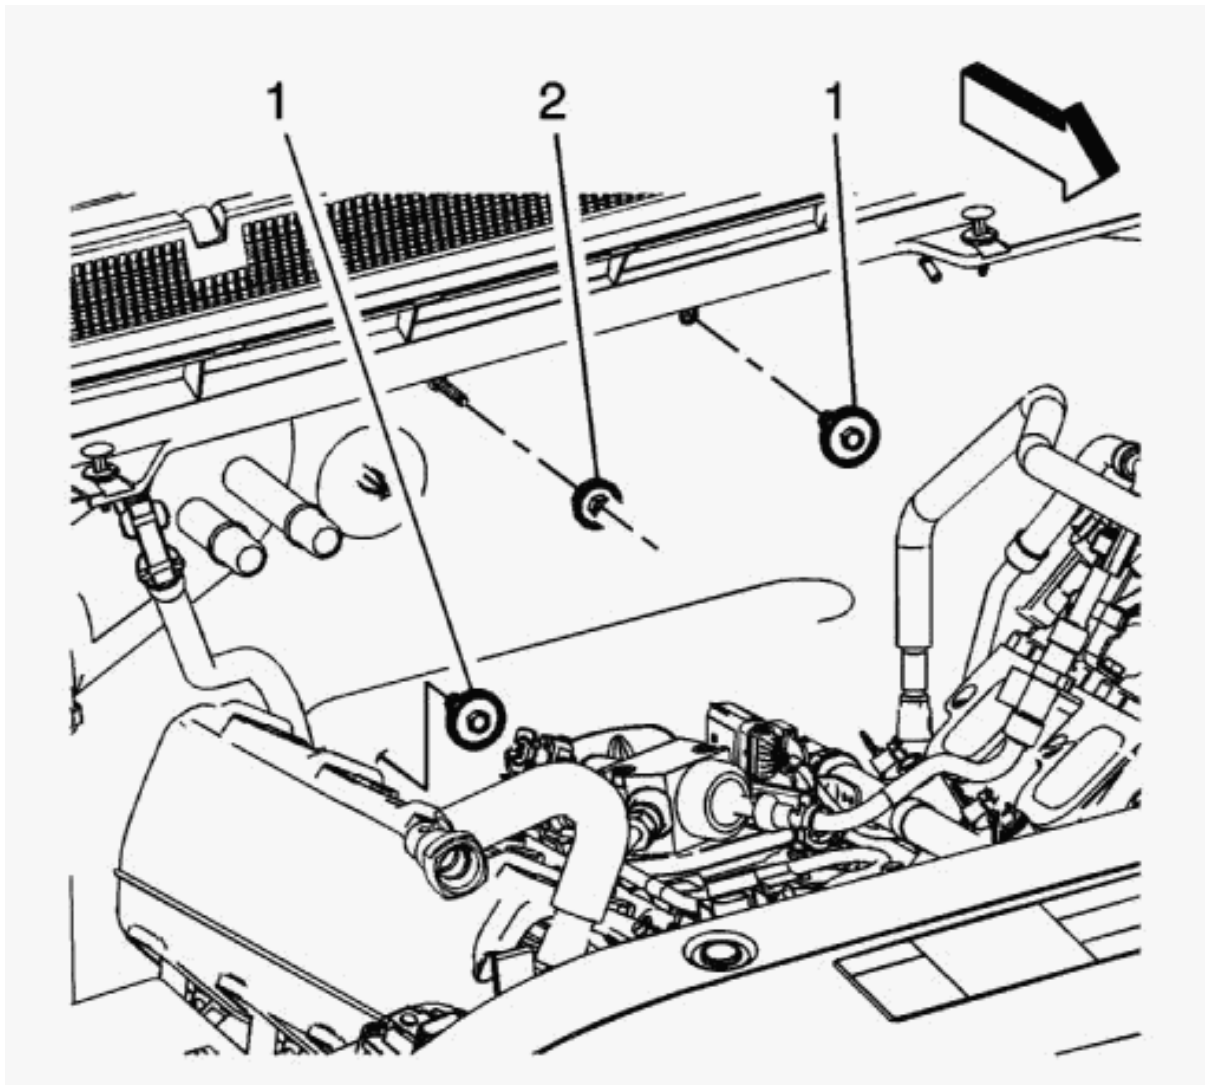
HVAC Module Assembly Bolts And HVAC Module Assembly Nut
